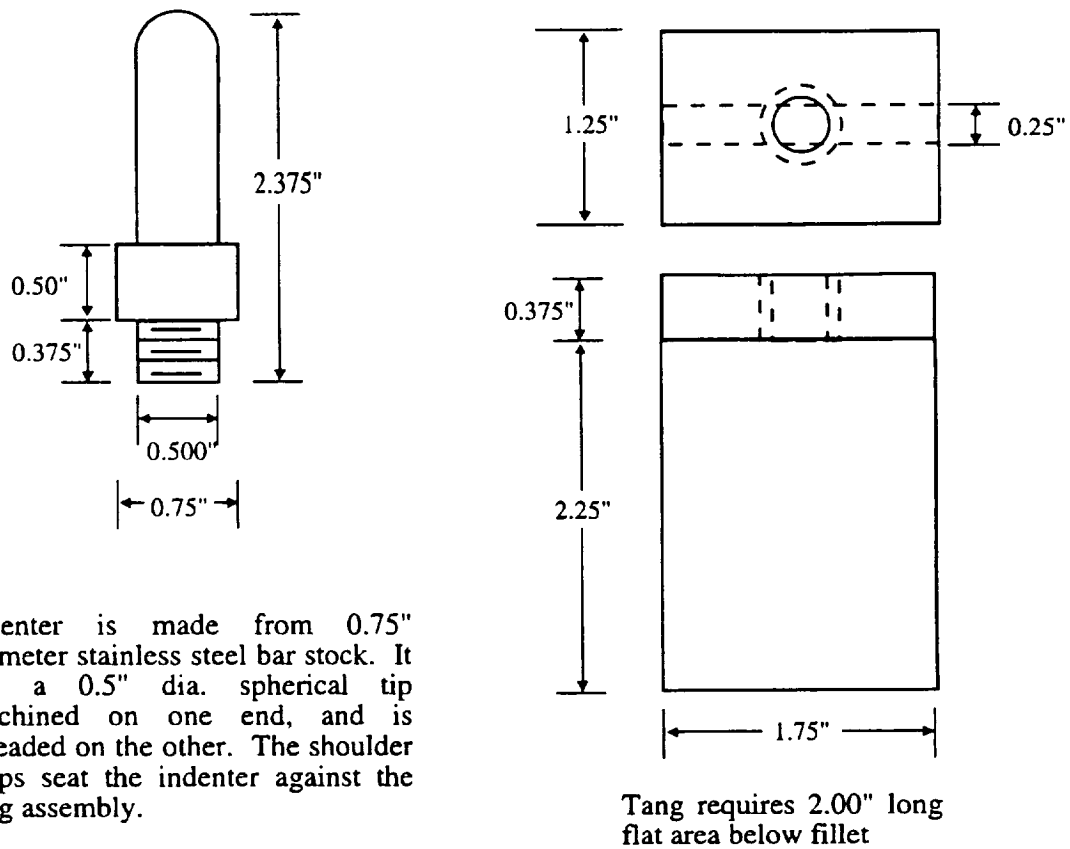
Schematic diagram of the indenter fixture used for quasi-static contact loading.
